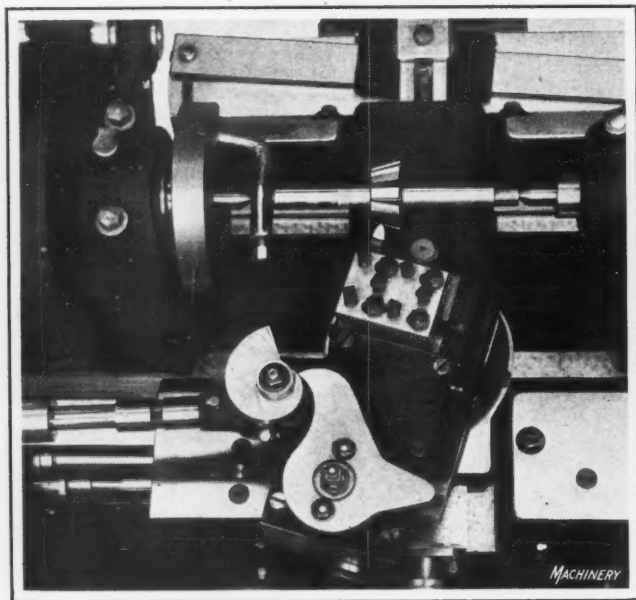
Using the Relieving Attachment for machining an Angular Cutter
